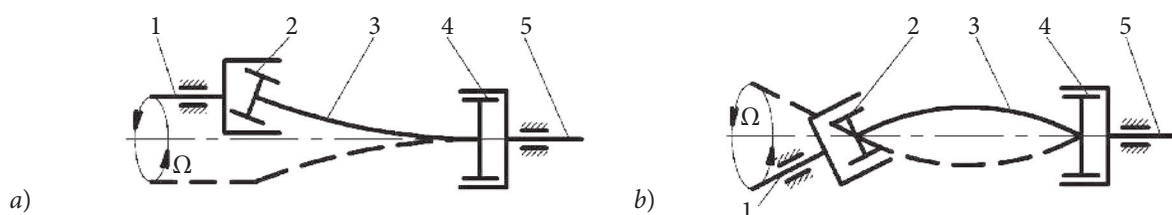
Runout (a) and misalignment (b) of the axis of the gear bushing: 1 – shaft; 2, 4 – toothed bushings; 3 – spring; 5 – drive mechanism shaft
